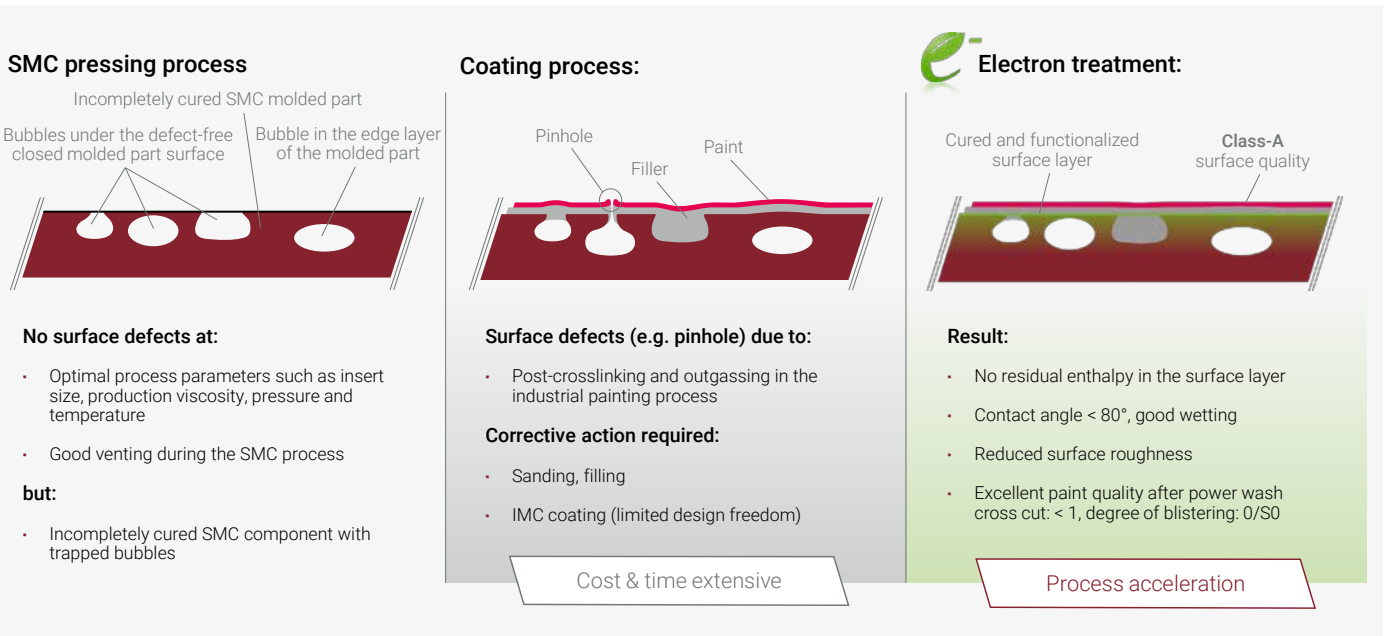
Novel pre-coating method for Sheet-Moulding Compounds
